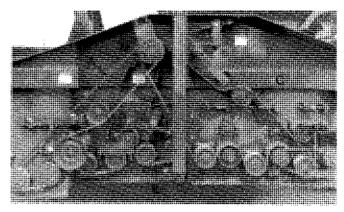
LEFT HAND DRIVES (Shield removed for clarity)
